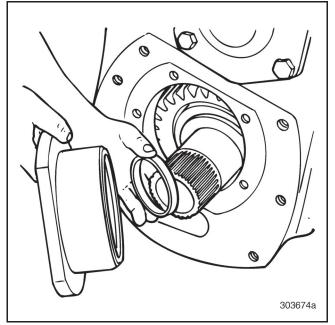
Removing Main-Drive Shaft Bearing Retainer, Bearing and Selective Spacer
